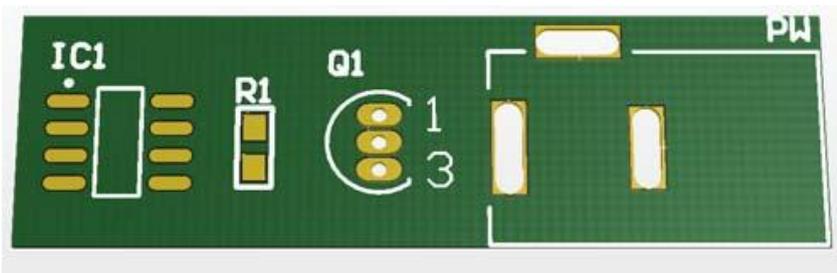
SMD IC1 e R1 and Thru-hole Pads (Q1 e PW)
